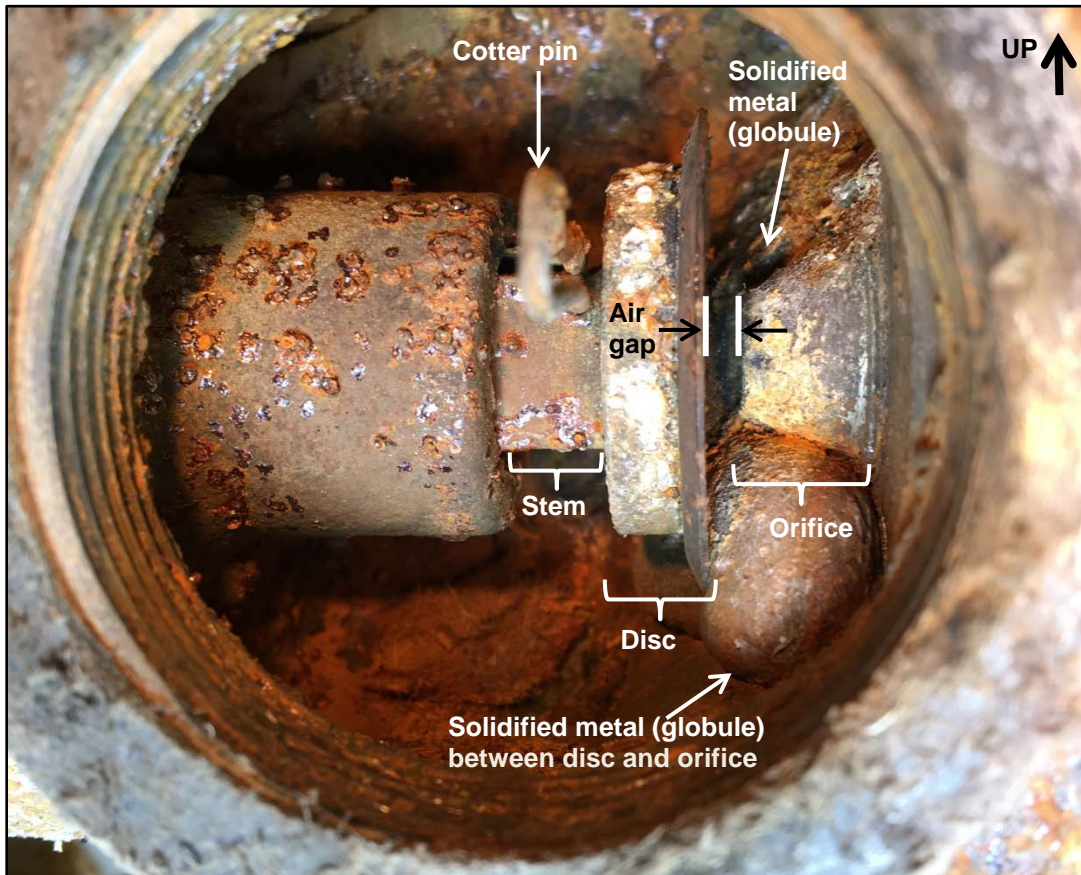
View through the 2-inch diameter internal threaded side port of the lower gas regulator assembly after disassembly of the plug, after cleaning the internal cavity with a soft bristle brush.
